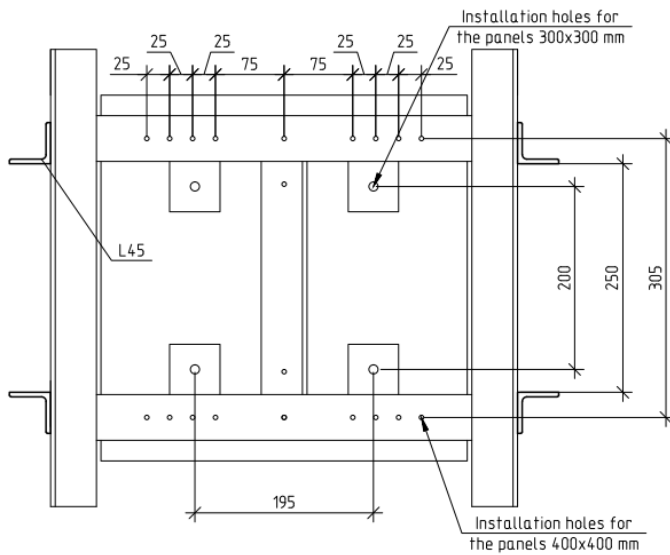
Location of sandwich panel fastening points on the test setup, top view.
